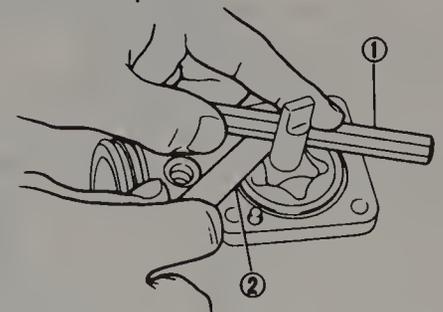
Measuring rotor-to-case and gear-to-case clearance (Sec 9)
